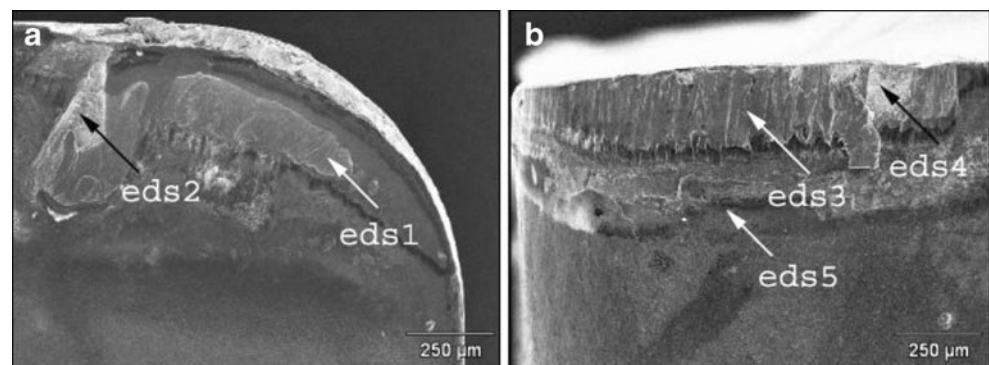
Tool rake and flank faces: $v_c=570$ m/min-HPHFR
